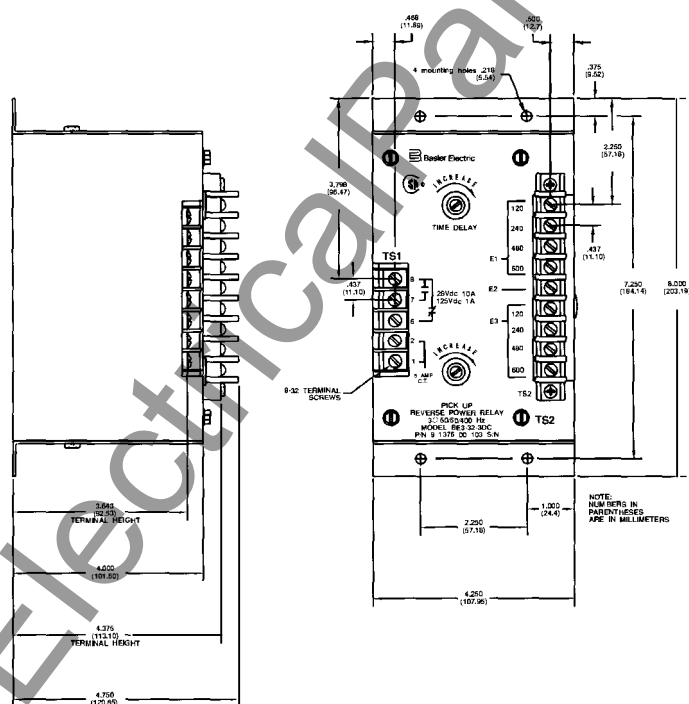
BE3-32-3 OUTLINE DRAWING
